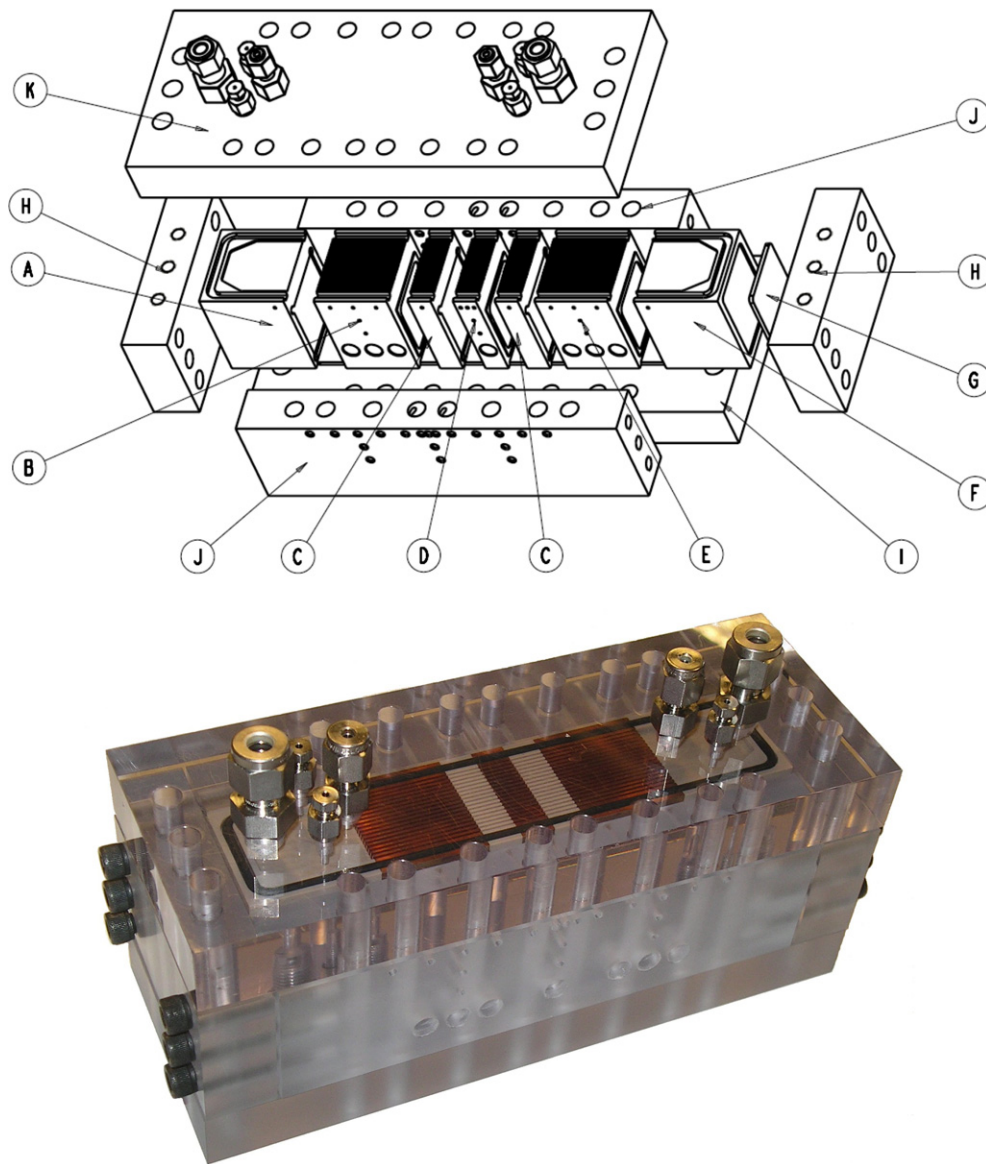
Test section assembly. Top: exploded view with the components (A) inlet piece, (B) pre-evaporator, (C) adiabatic piece, (D) test piece, (E) post-evaporator, (F) outlet piece, (G) rubber compression, (H) front and back pieces, (I) bottom piece, (J) side pieces, and (K) top piece with fluid ports and bottom: picture of the assembly.
